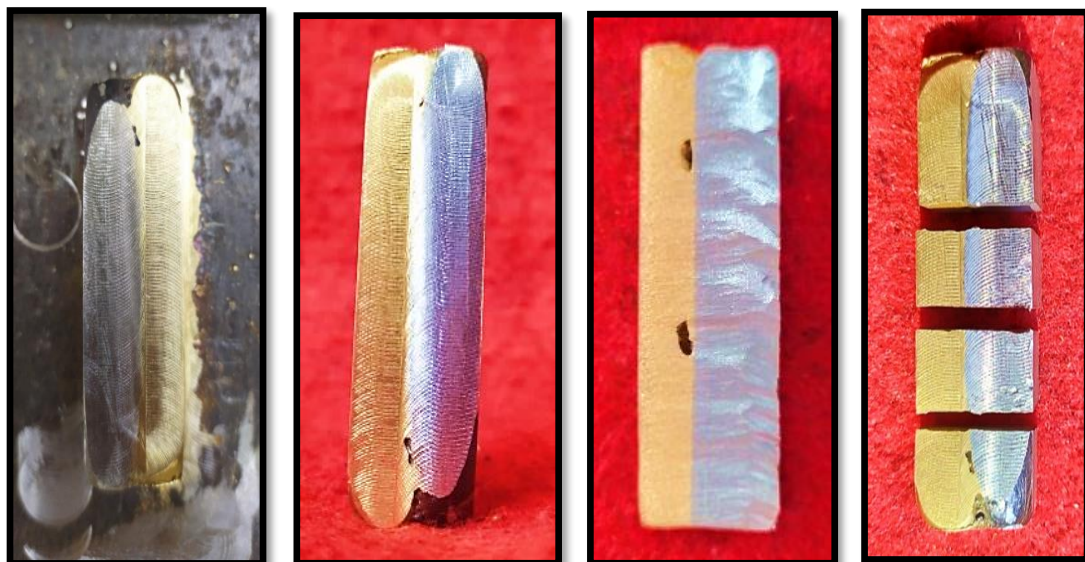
(c) Machined bimetallic wall 2(d)Detached bimetallic wall from substrate
